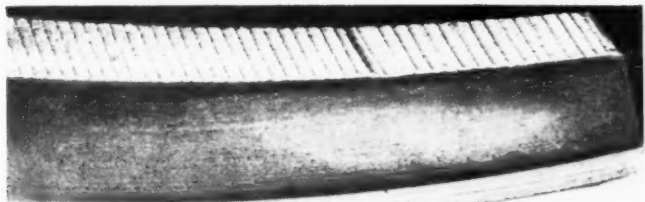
New ring gear tooth surface — High Speed Axle Test.
